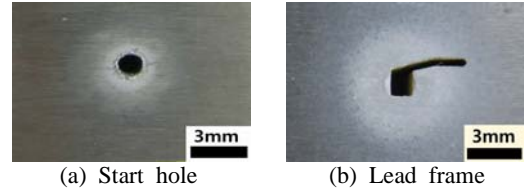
Occurrence of electrolytic corrosion on WC-Co workpiece
